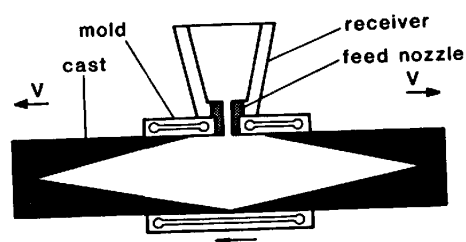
Schematic drawing of USSR type machine³⁸⁾.
